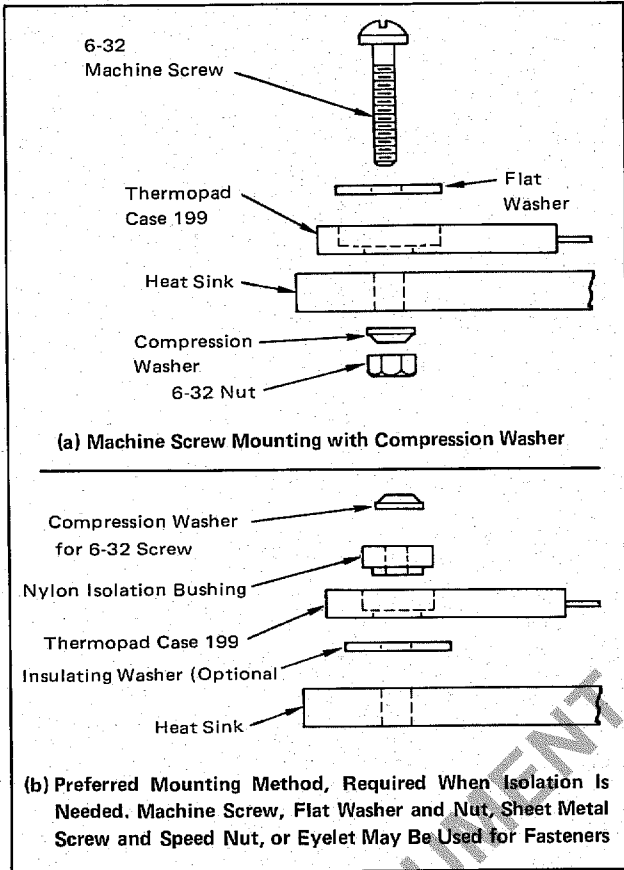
Recommended Mounting Arrangements for TO-126 and TO-127 Thermopad Packages
